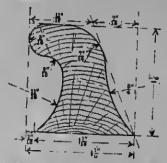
Alternative Section for Fence Moulding for Tray.
